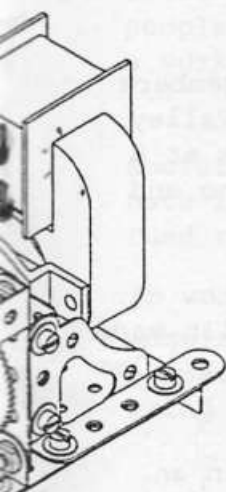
The gearbox and motor have been completely removed to reveal the arrangement of the side of the frame supporting the pressure roller.
